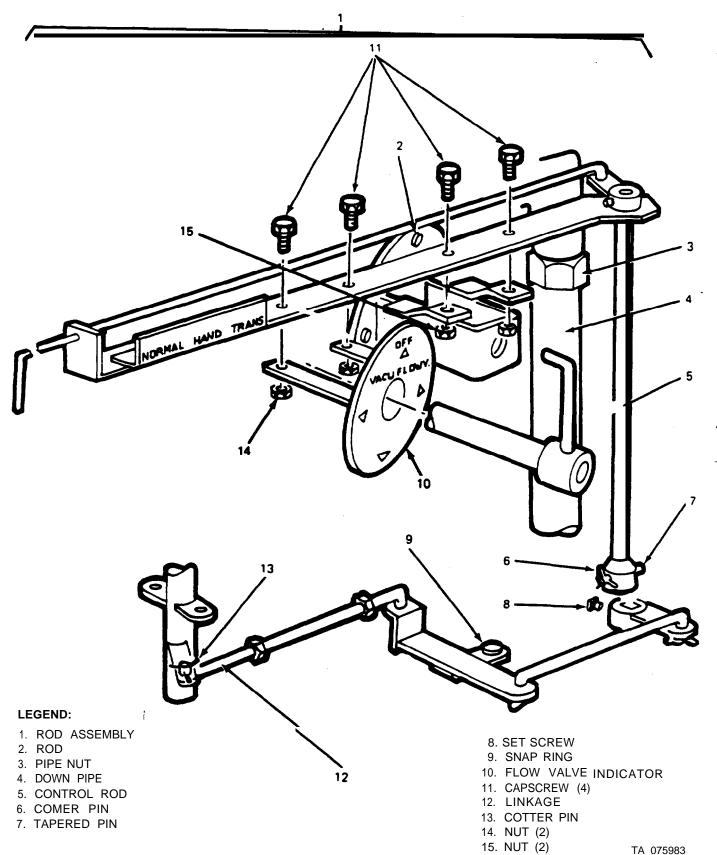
Disconnect/connect Control Linkage and Manifold.
